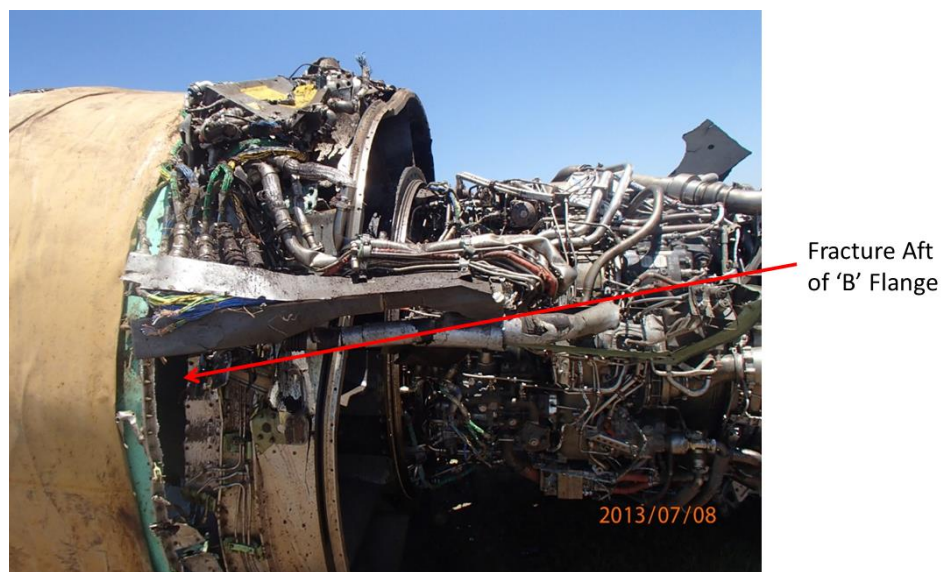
Fan Case Fracture Aft of 'B' Flange
